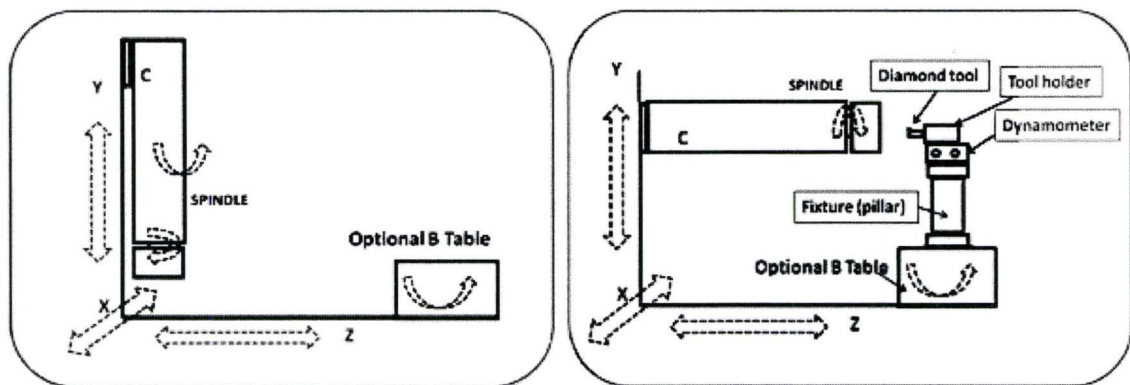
Schematic of (a) initial and (b) modified machine axes and spindle set-up
